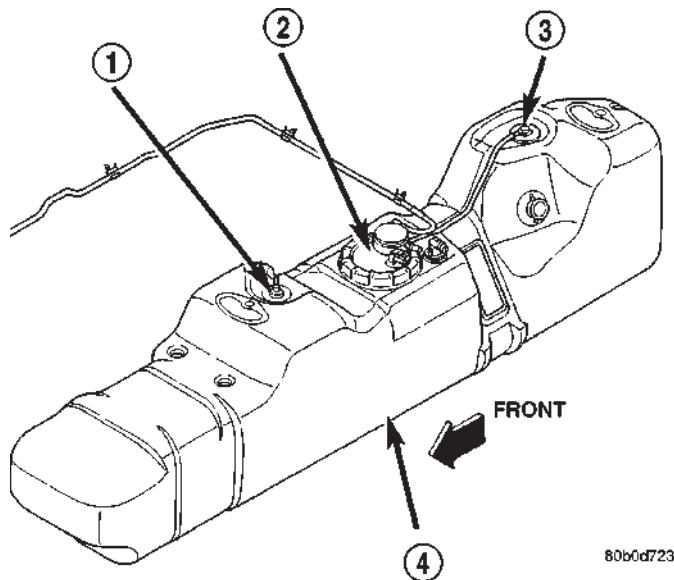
Rollover Valve Locations - Gas Powered with 35 Gallon Tank
